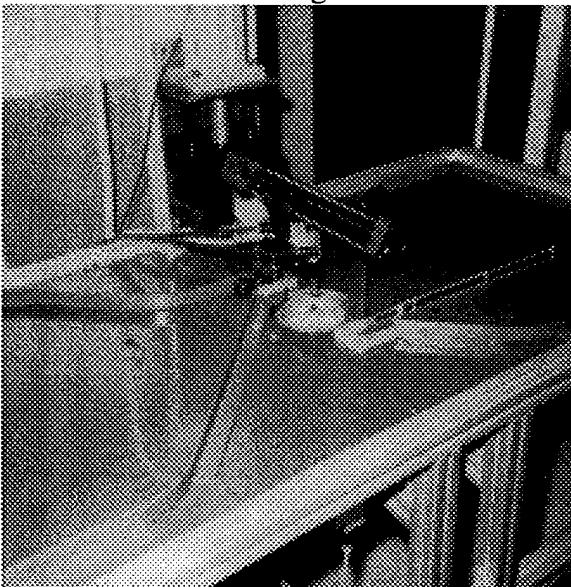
Detail of Automated Bearing Ball Inspection Station: Materials Handling / Resonant Inspection / Ball Sorting table.
